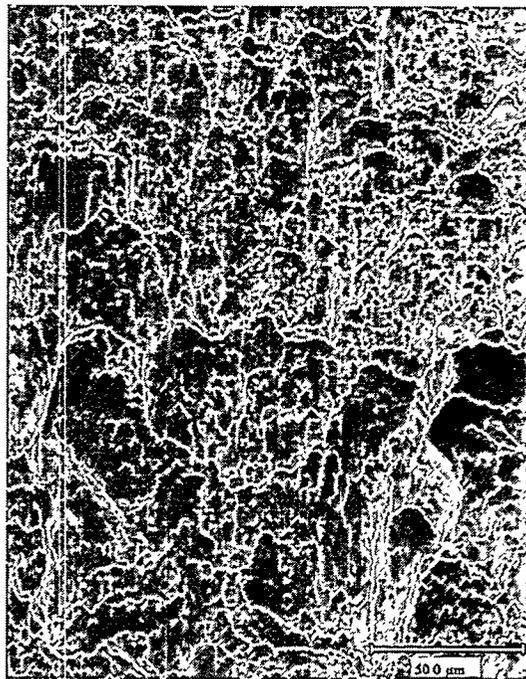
Sample 72-1 ductile fracture (ET 325623).
